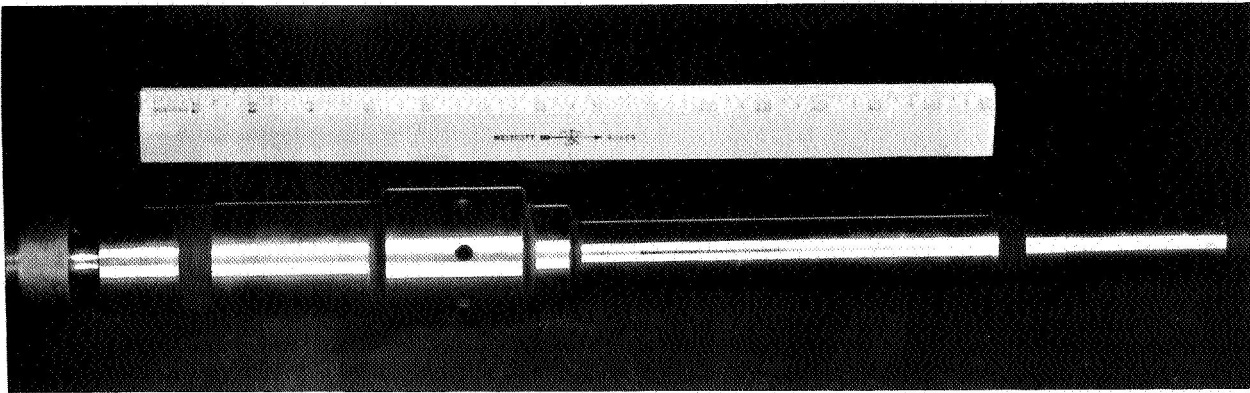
DRIVE SHAFT WITH INTEGRAL DISK
